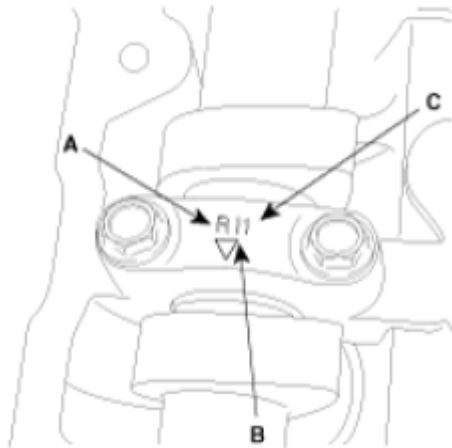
Identifying Bearing Caps Marks On Proper Position
